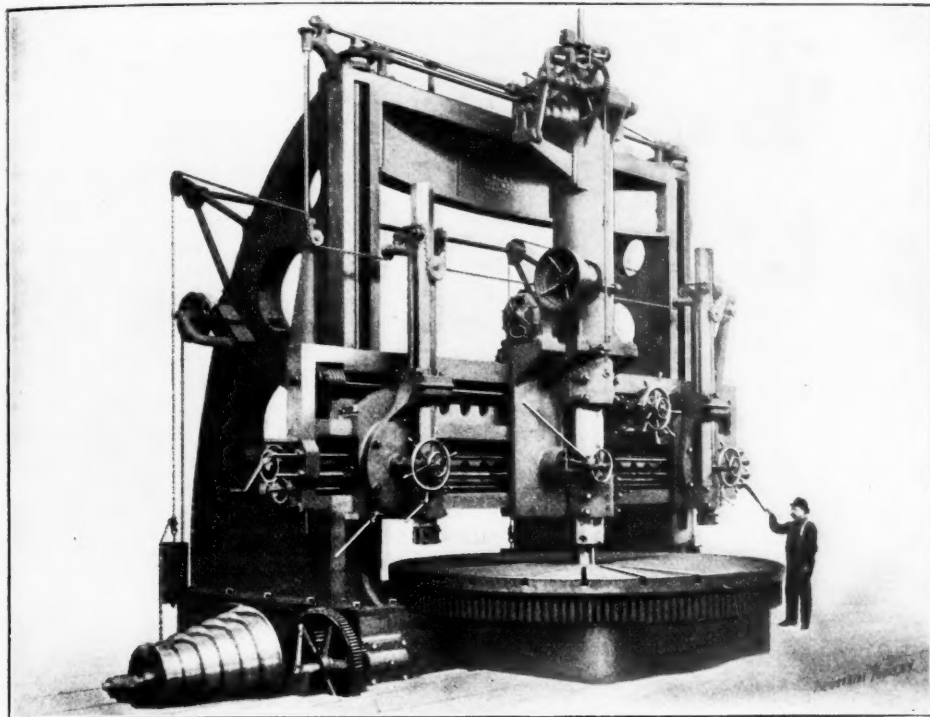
Boring Mill with three Motors, showing what can be done where there is no Line Shafting.
